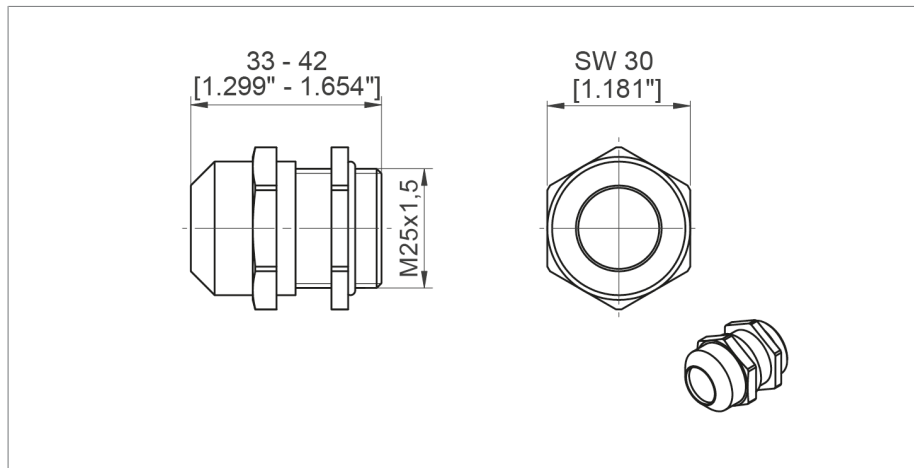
Offshore cable screw connection; material: stainless steel (V4A); clamping range 9...17 mm
